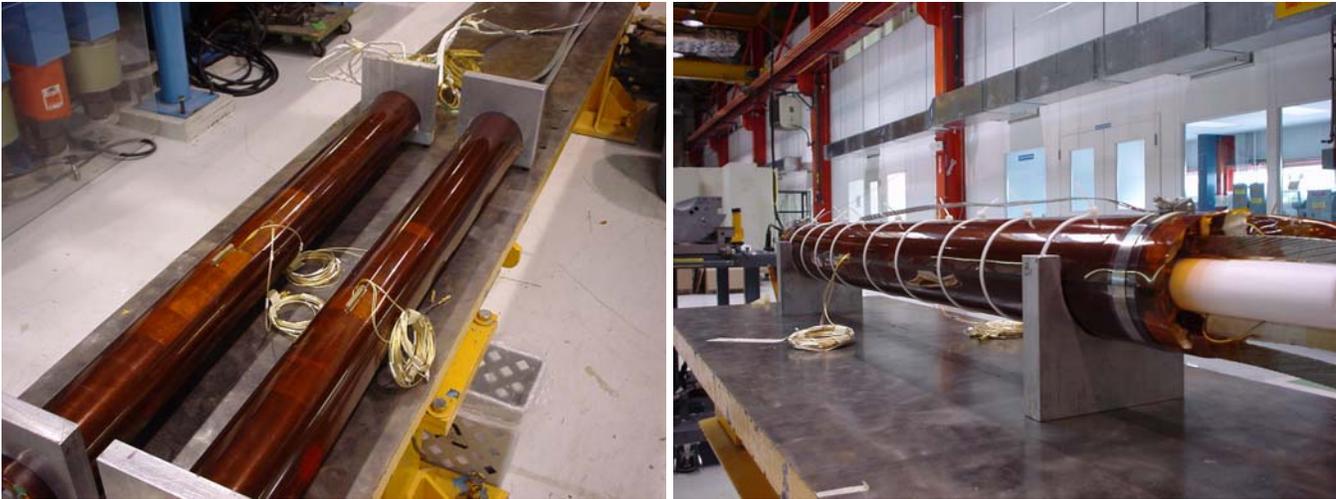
Layout of spacers with resistive gauges in the magnet straight section.
